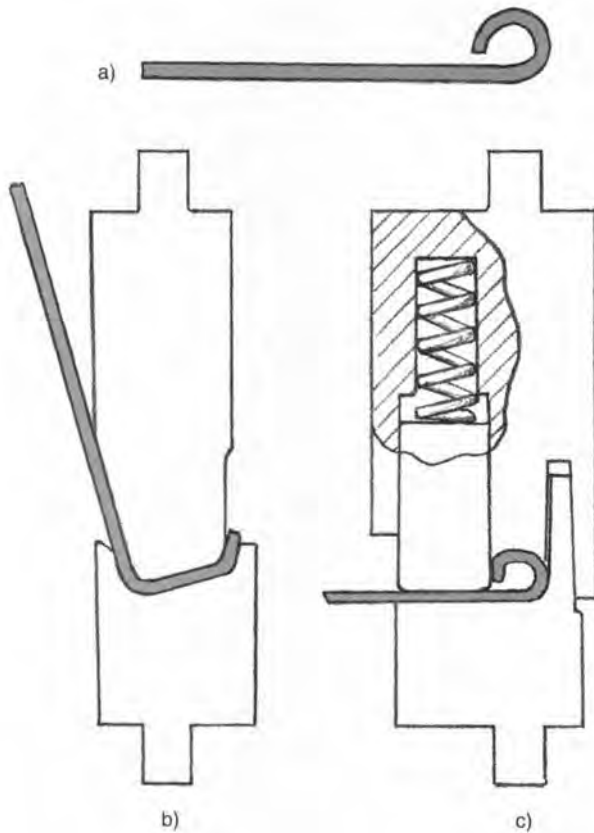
D11 Edge curling. a) cross-section of a sheet with a curled edge. b) and c) show the two-step sequence of forming a curled edge with press brake dies. The second die includes a member to hold the sheet from shifting during the final curling step.
